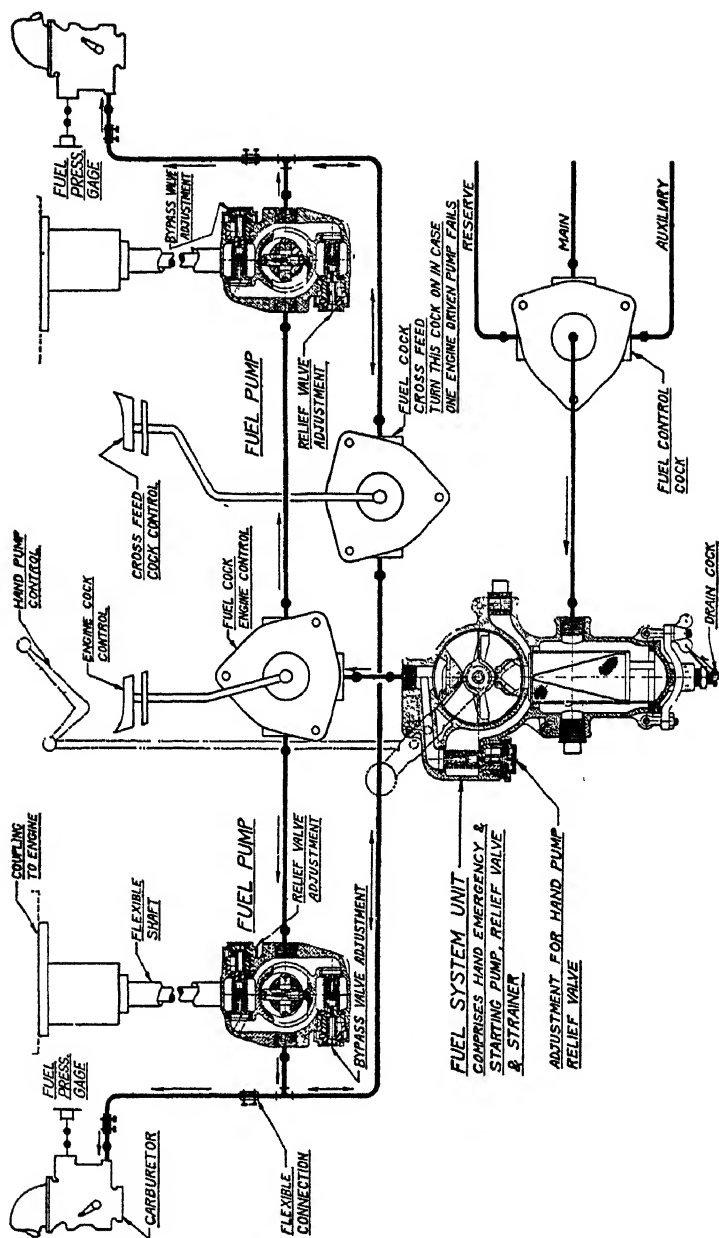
Twin-engine fuel-system with remote-driven pumps, cross-feed, and a single hand pump for starting and emergency operation. (Romec Pump Co.)
